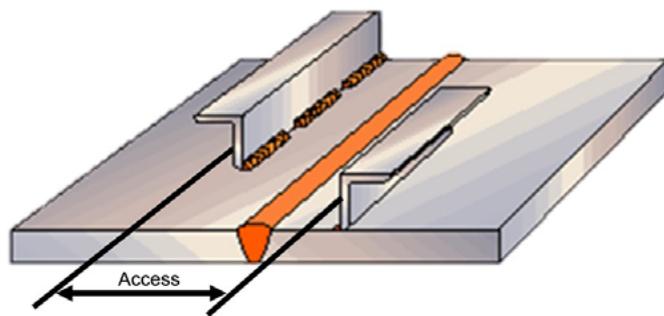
Longitudinal stiffening preventing the deformation of thin butt-welded joints [9]
